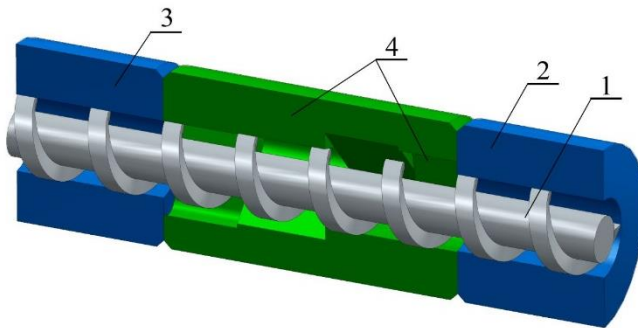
Longitudinal section of the plasticizing system with a classic screw equipped with four rotational barrel elements: 1 – screw, 2 and 3 – immovable barrel parts, 4 – rigidly joint rotational barrel elements with a hole in the shape of a triangle
